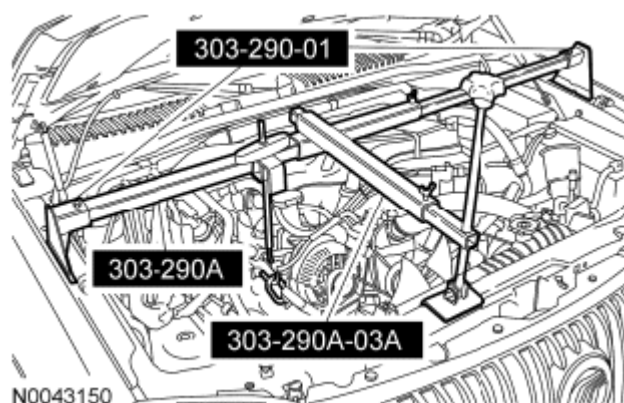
Identifying Engine Support Bar And Adapters For 303-290A
